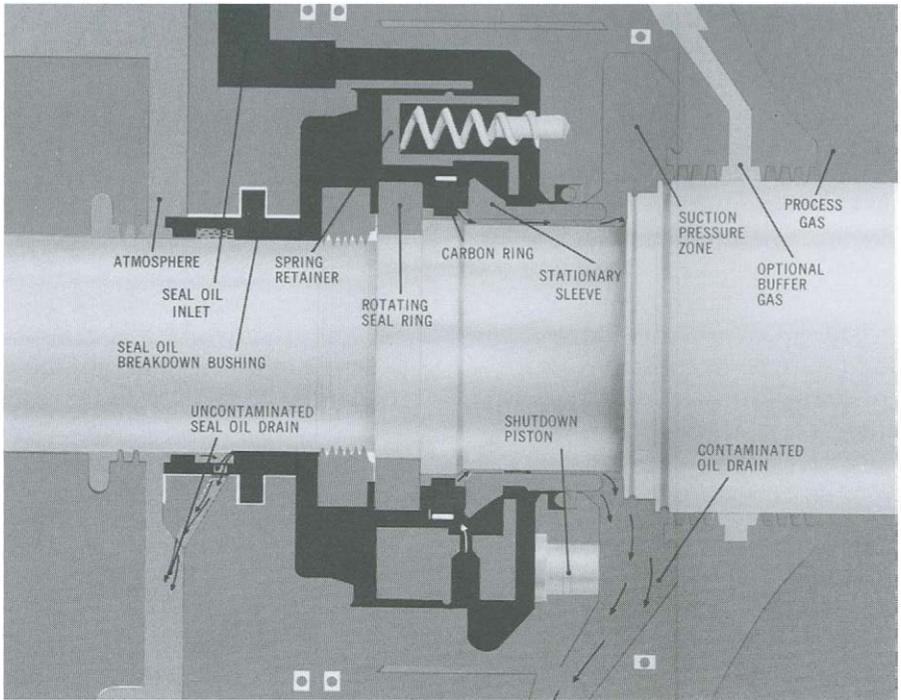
Compressor contact seal (Courtesy of Elliott Co.)
